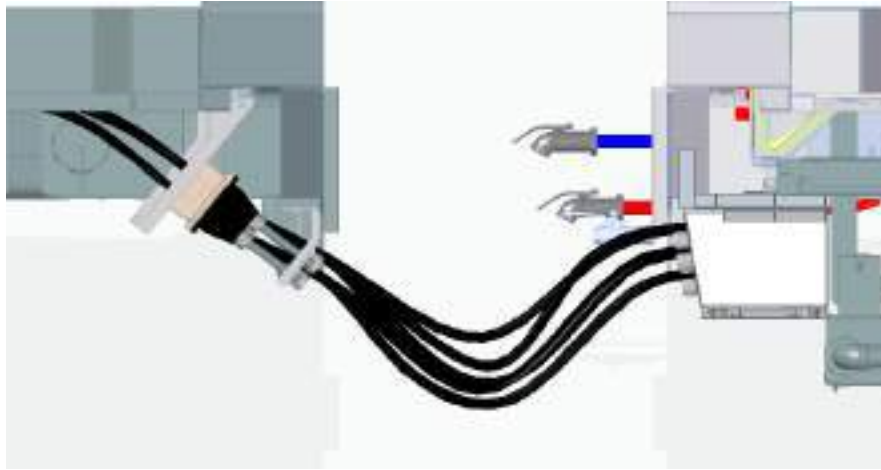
Mounting location of power coupler assembly on under-frame-motor coach
